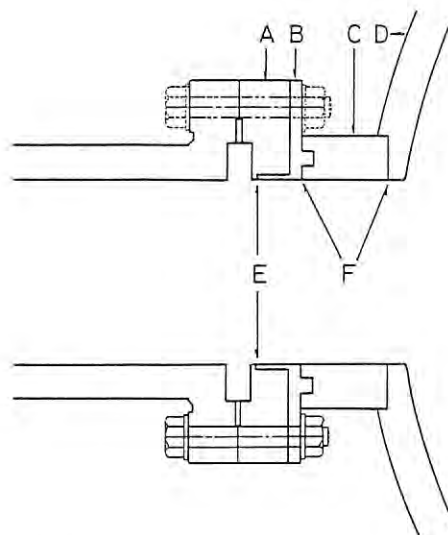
Schematic drawing of the housing of the tuning plunger. A: vacuum flange, B: transition piece, C: port, D: cavity body, E: He-arc welded part, F: silver-brazed parts.
